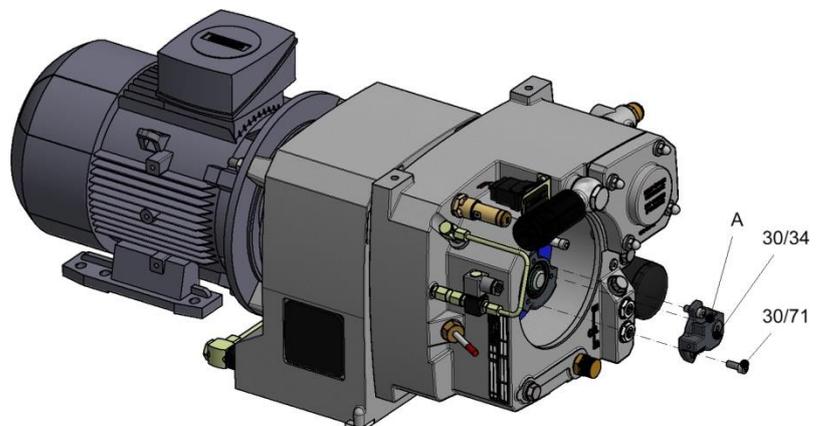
Disassembling the controller lid (Pos. 30/34)
